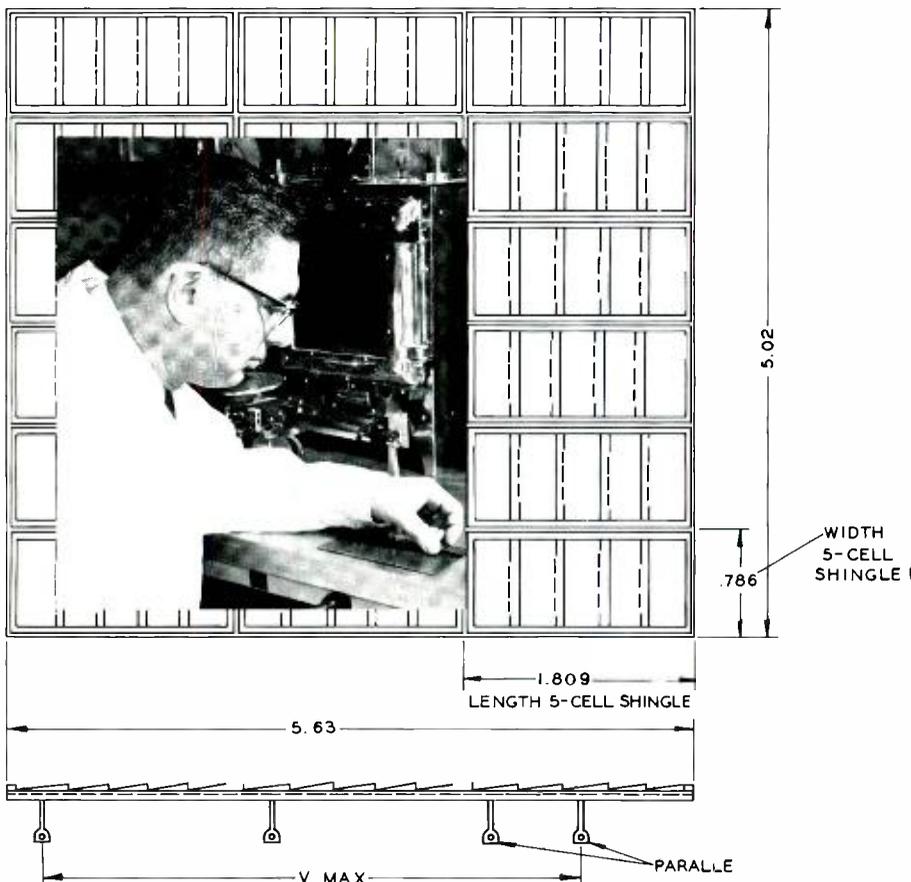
Sketch showing layout of a 90-cell module made up of 18 five-cell shingles. In the photo, O. Gosman assembles a similar module.
